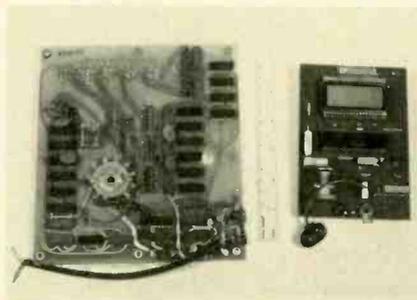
TWO TYPICAL PC boards with problem shapes. They won't fit into standard cabinets.
